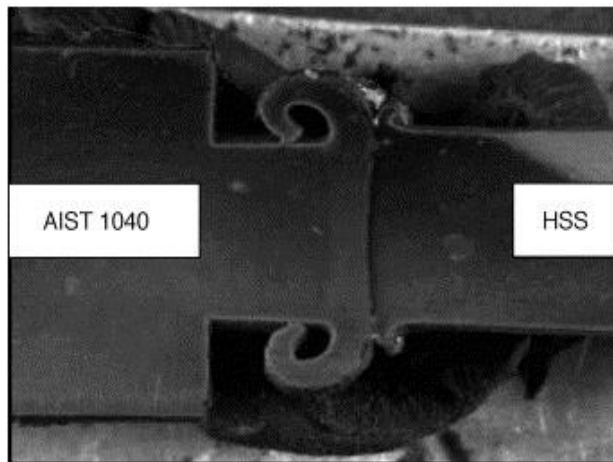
Macrophotograph of joint, as welded [27]
